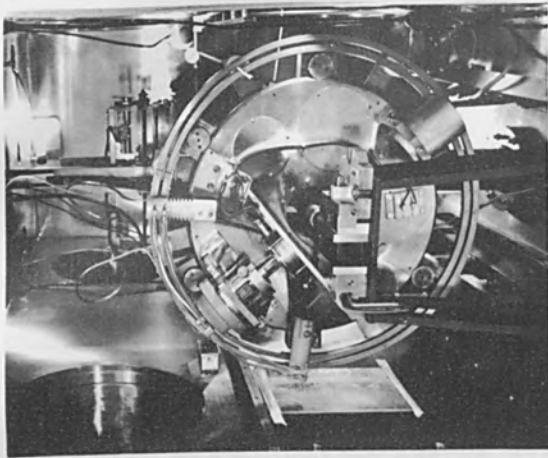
Fixture for Welding 1" I.D. Columbium - 1% Zirconium Tubing
